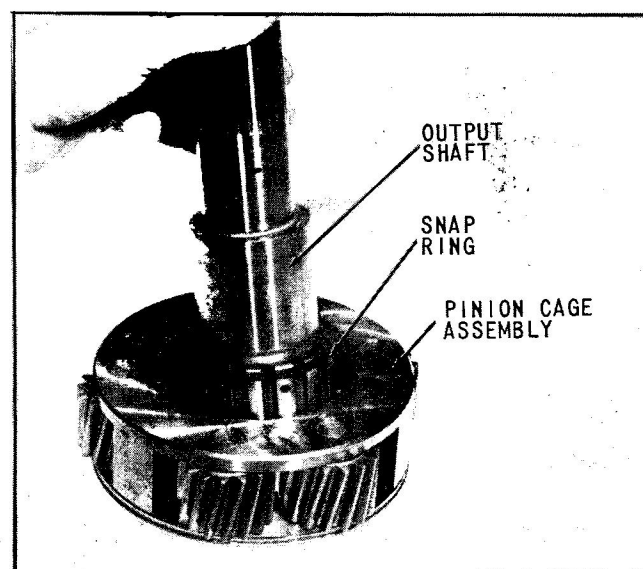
Install Carrier to Output Shaft (1.5 to 1 Ratio)
